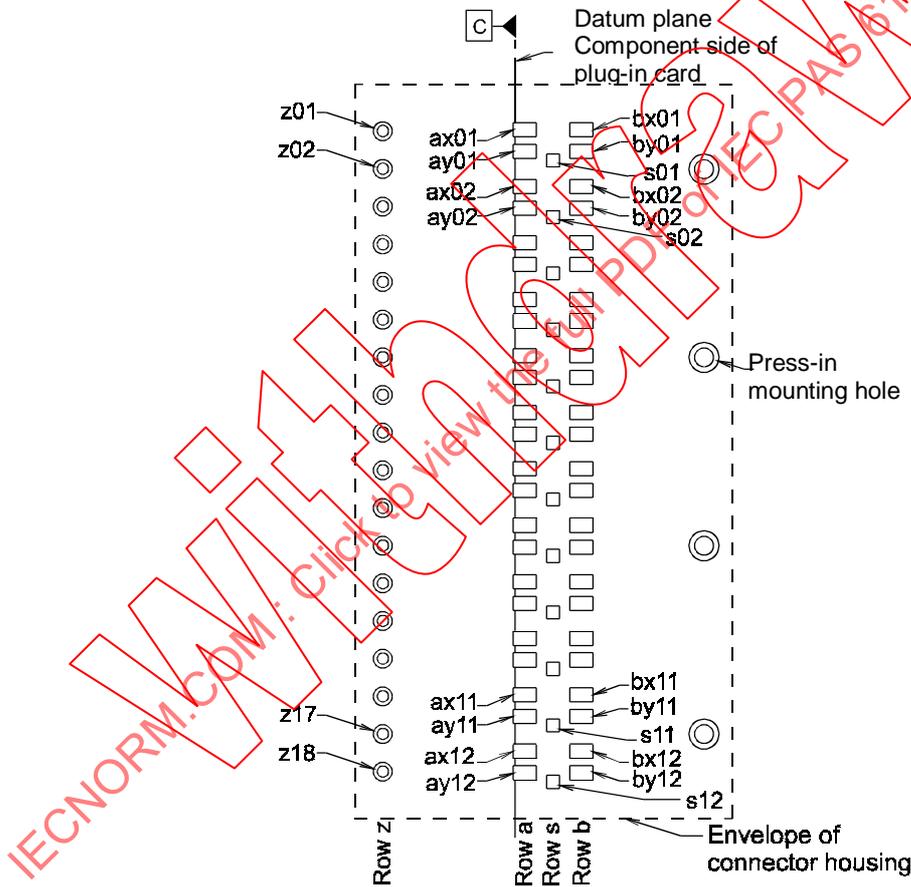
Designation of contacts on backplane for press-in/compression mounting
